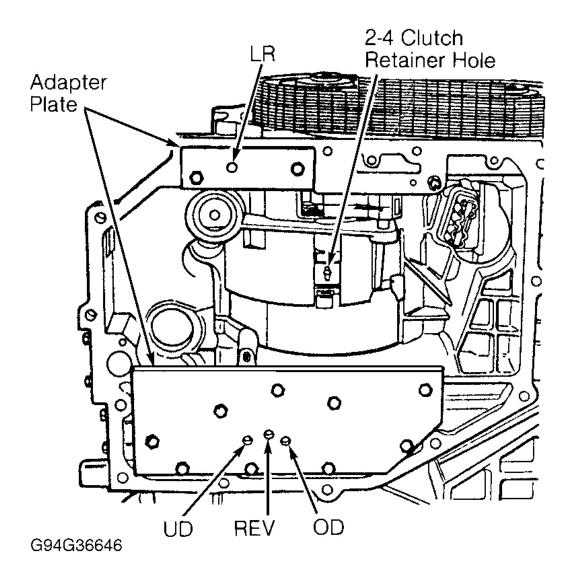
Applying Air Pressure To Clutch Packs Courtesy of CHRYSLER LLC
